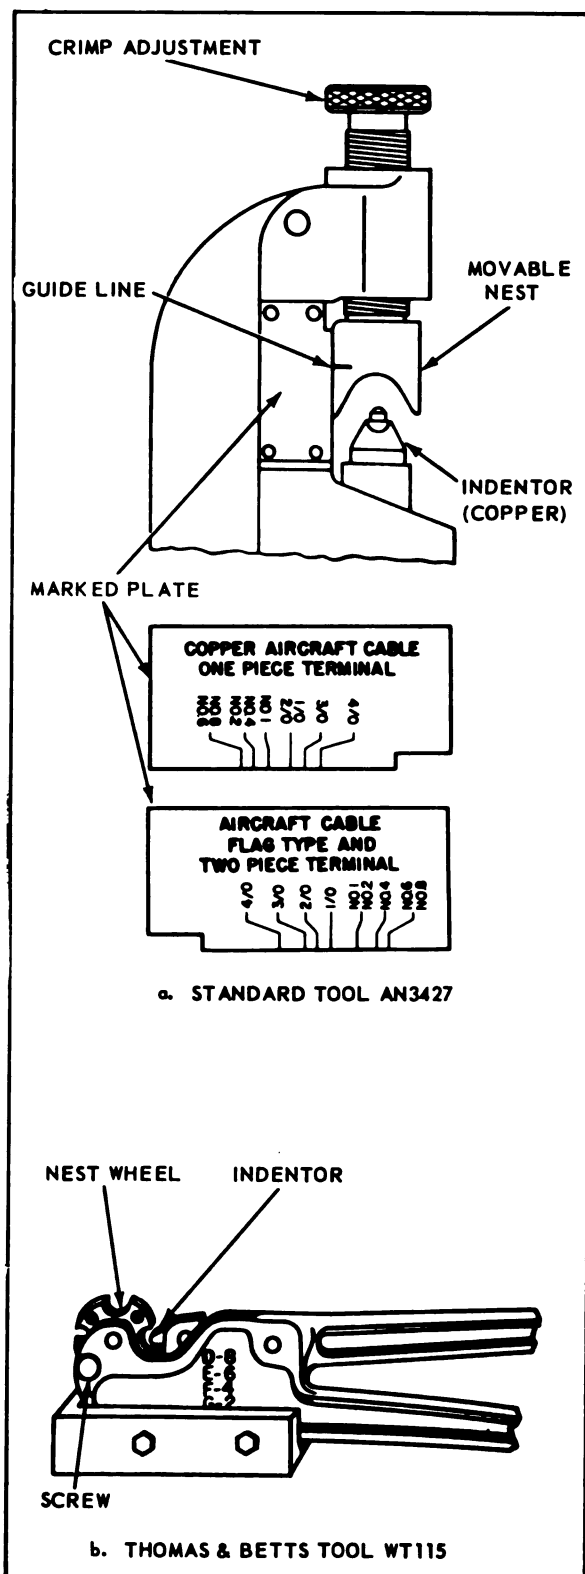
Tools - Hand Crimping Large Copper Terminal Lugs
